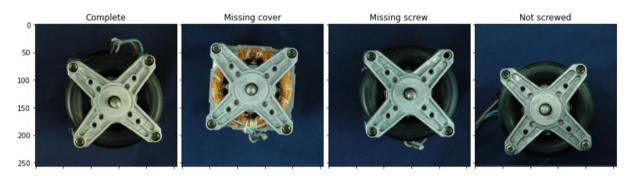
Top view of the images is considered and the target is to detect three defects, missing cover, missing screws and not screwed after assembly.
